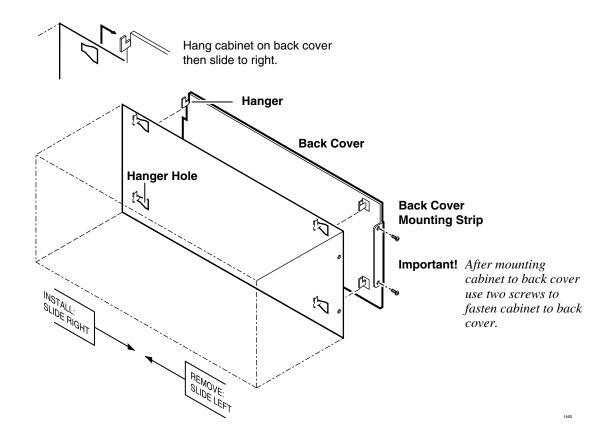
CTX670 Mounting Cabinet on Back Cover
